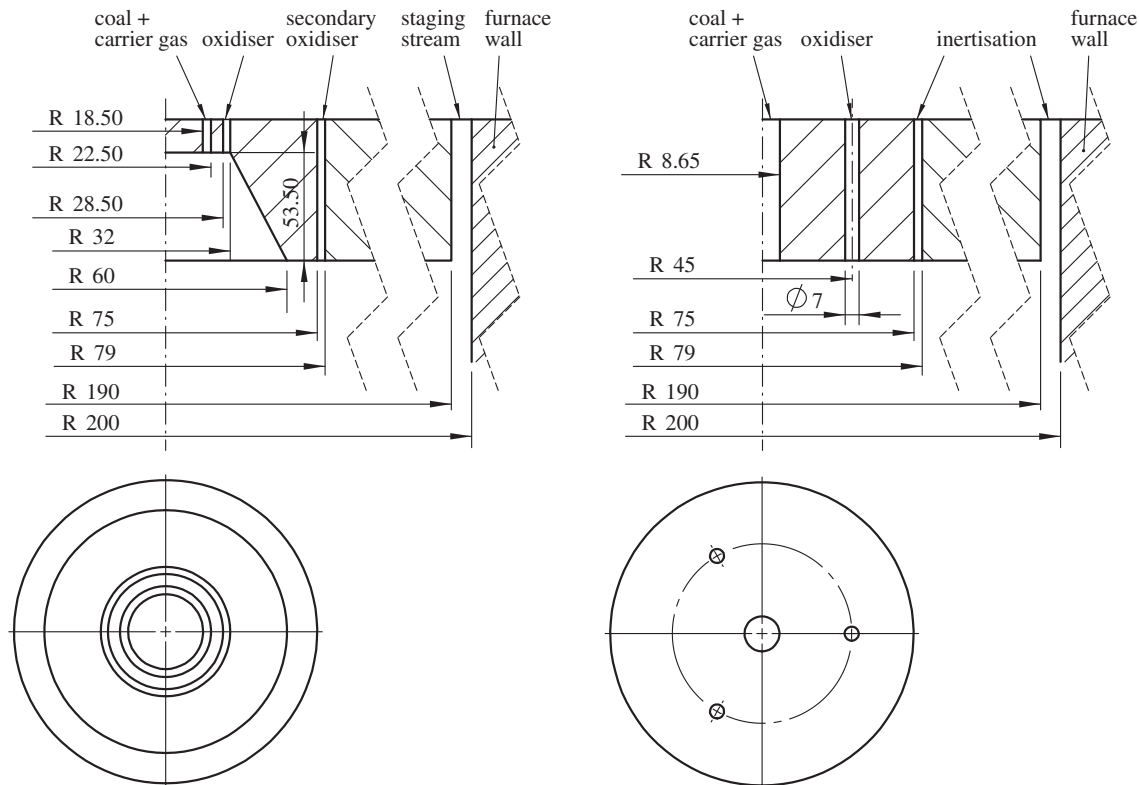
Burner design of swirl burner (left side) and flameless combustion burner (right side), sectional view on top and bottom view below.
